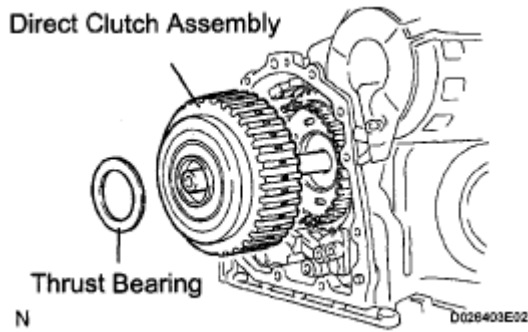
Identifying Thrust Bearing And Direct Clutch Assembly
